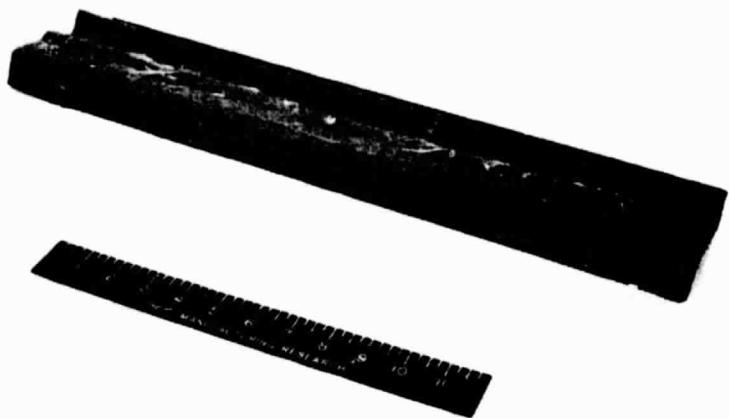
Formed Rubber Blanket Used to Define Bead
